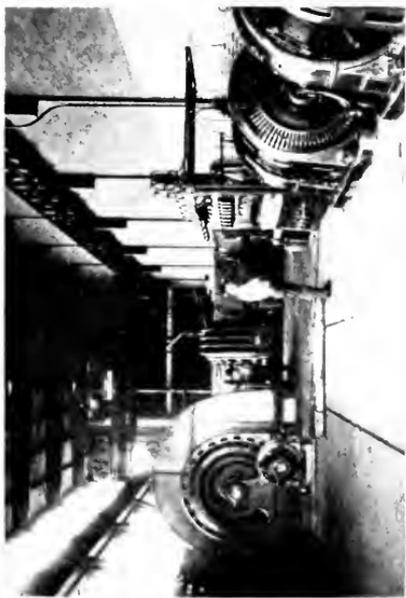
General View of Blooming Mill Motor Room showing Reversing Motor, Flywheel Motor generator, and Synchronous Motor generators for Direct-current Auxiliaries
